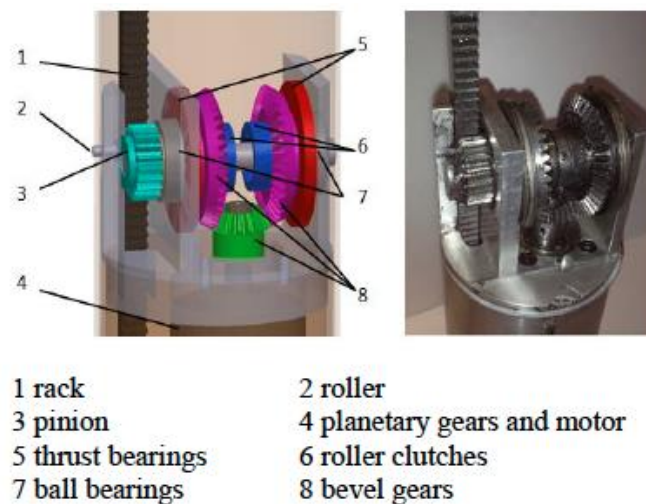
Mechanical motion rectifier gear module prototype [83]
